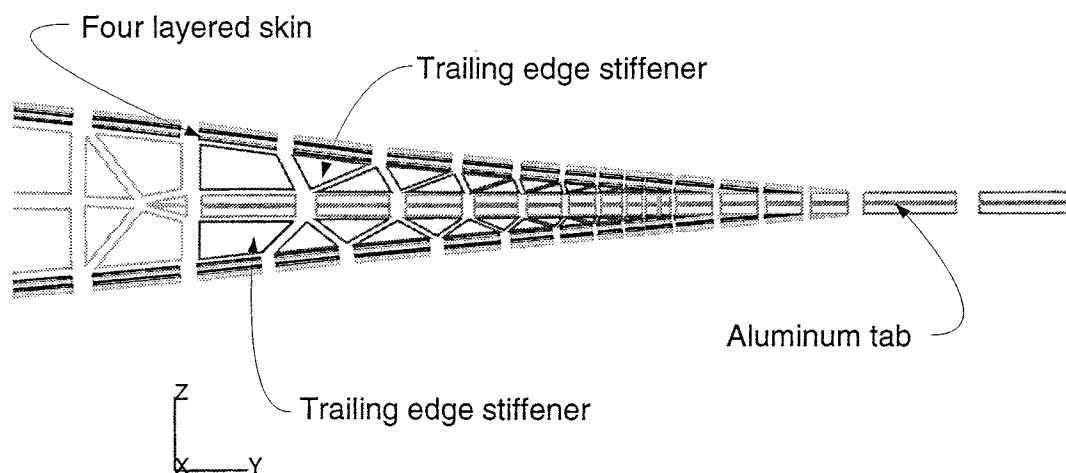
ONERA section: Detail of trailing edge finite element mesh
